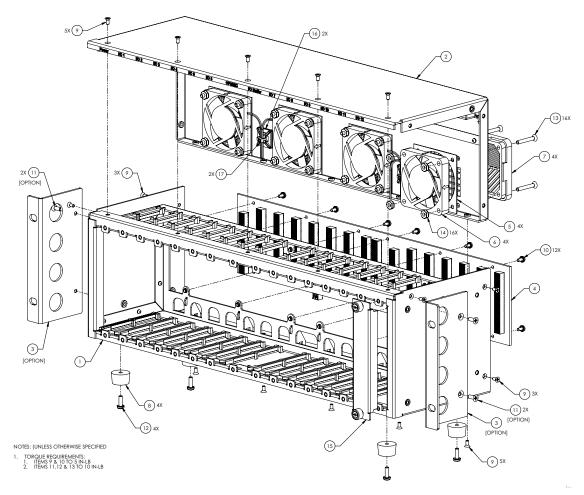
Typical RACKtangle Enclosure (Exploded View)
